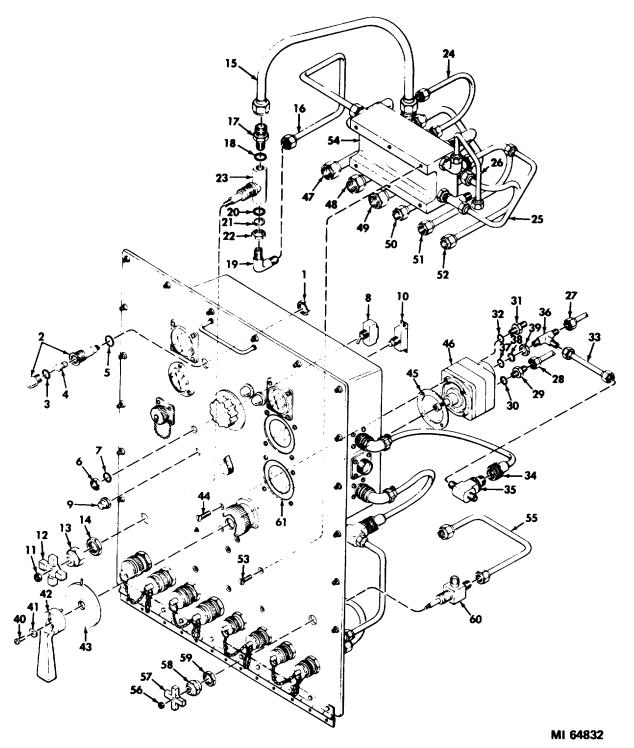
Components of the hydraulic test console upper center control panel-partial exploded view (part II).
